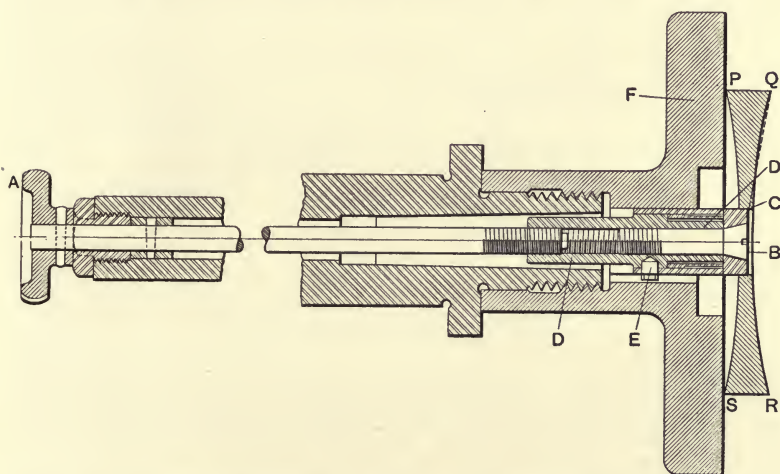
COLLET MECHANISM OF UNIVERSAL GRINDER.—BROWN & SHARPE
